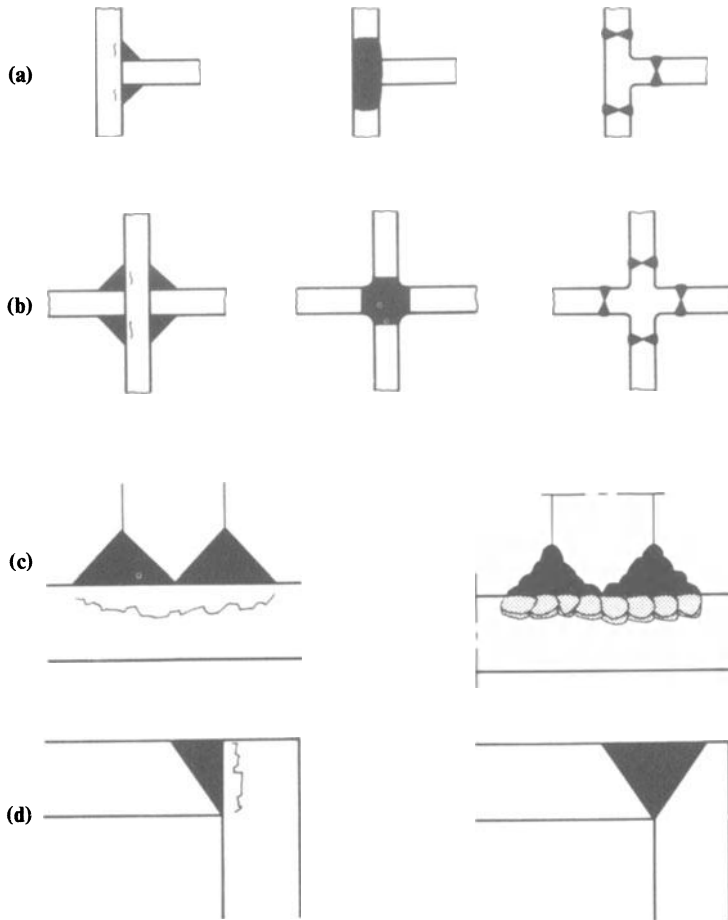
Redesign to avoid lamellar tearing: (a) and (b) replace fillets with solid weld metal or forged sections; (c) buttering; (d) modify preparation of corner joints. (In part after Dorn and Lai Choe Kming 1978. *Schweißen und Schneiden* 30, 84–6.)
